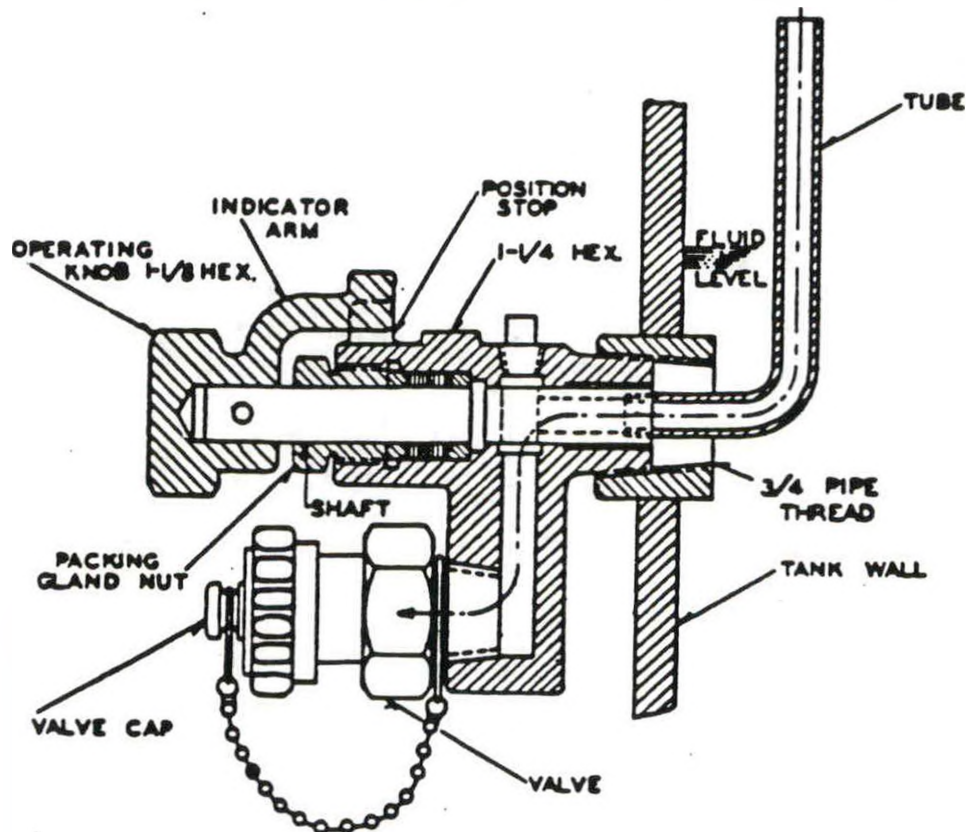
Westinghouse Rotary Type Sampling Valve
